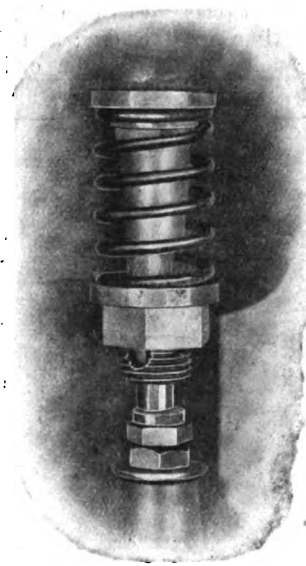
The Bramley Valve Attachment as fitted in position.
